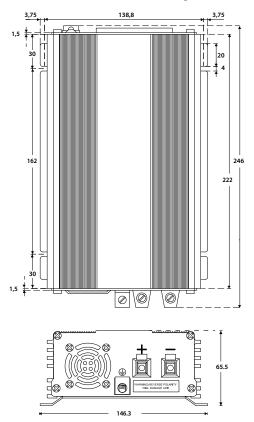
PST-300-12 & PST-300-24; Overall Dimensions & Mounting Slots
